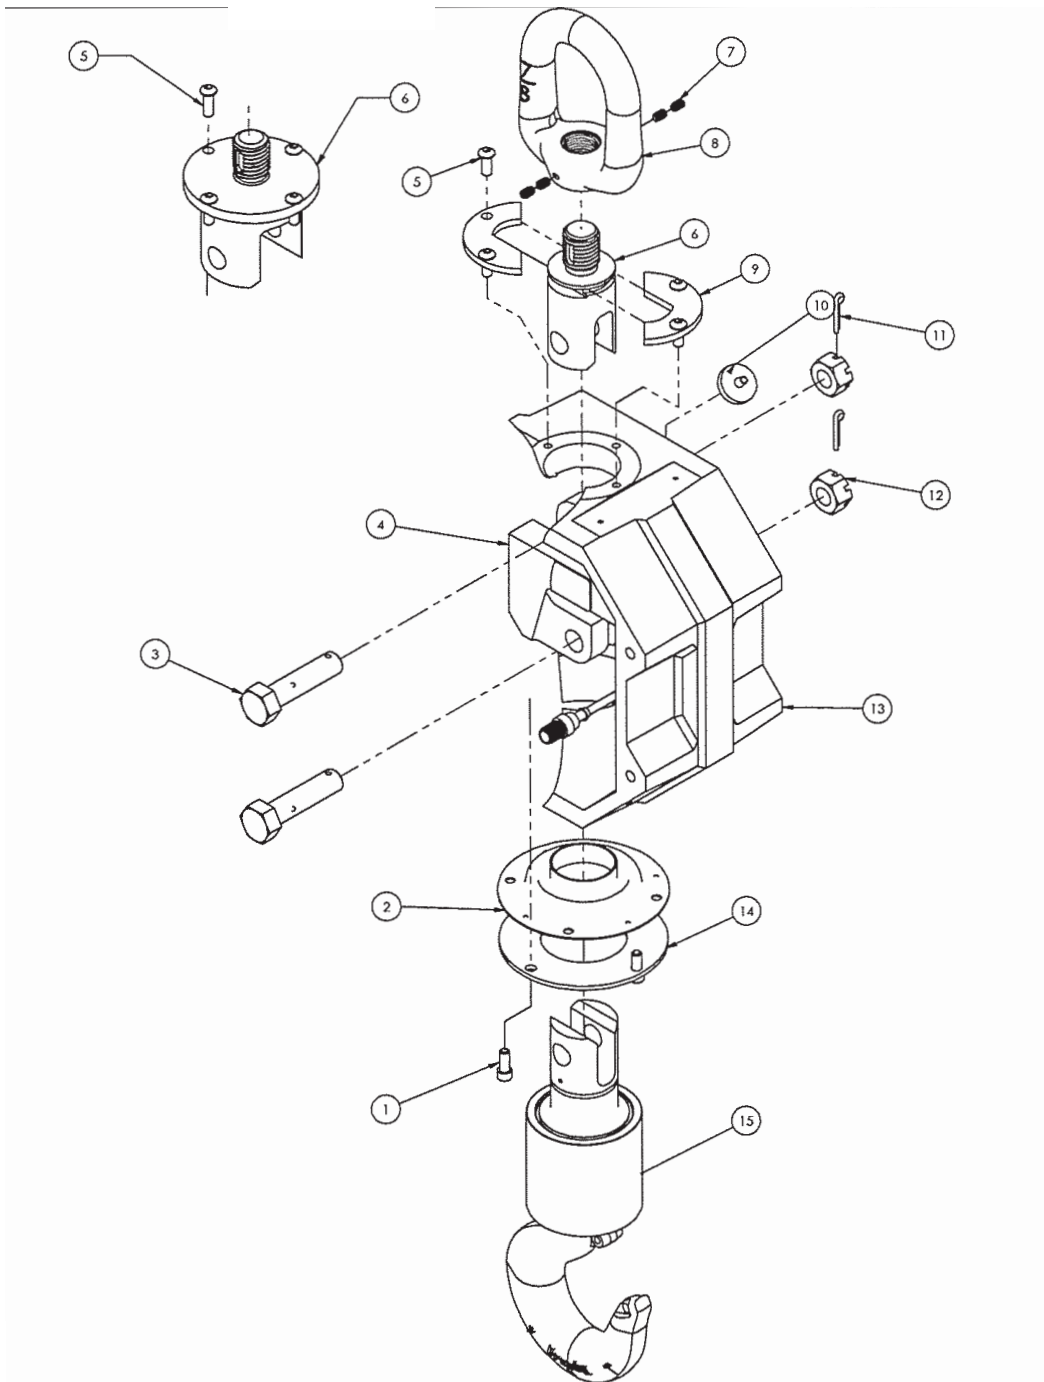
MSI-6360 Mid-Section Assembly 500 lb to 10,000 lb
